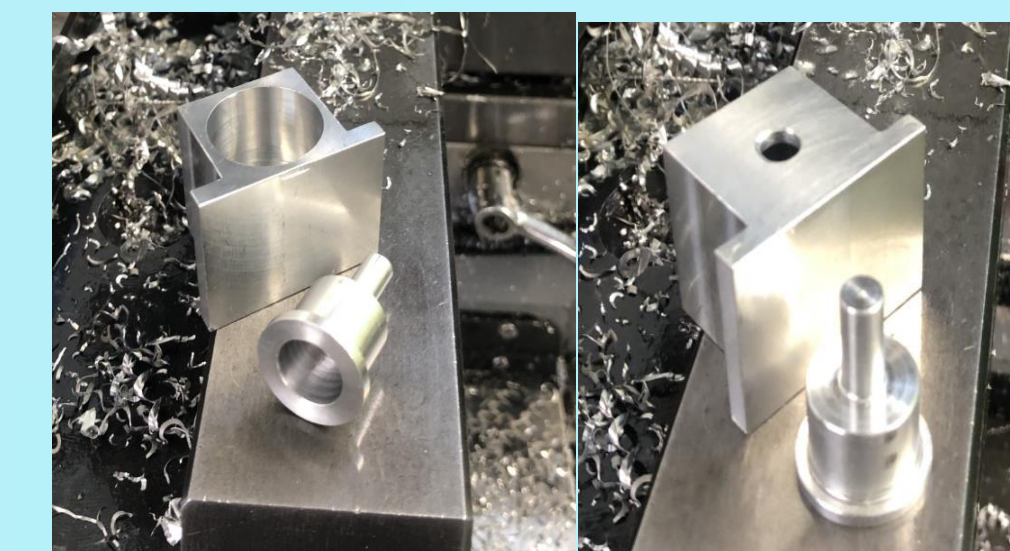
and 6 show completed housing and pin before holes were bored for assembly
